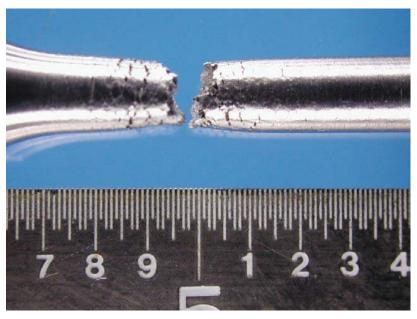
SCC produced on welded carbon steel in fuel ethanol.
